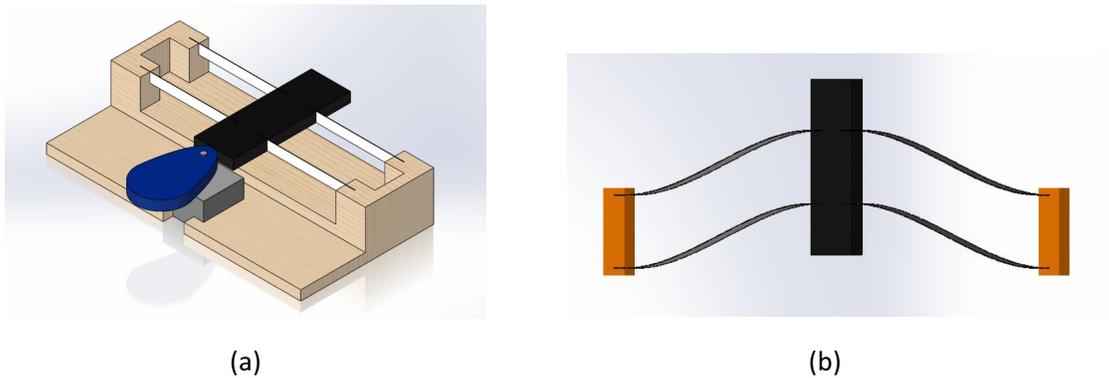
(a) Flexible double arm as alternative to rigid slider crank mechanism, (b) The deflected configuration of the flexible beams
